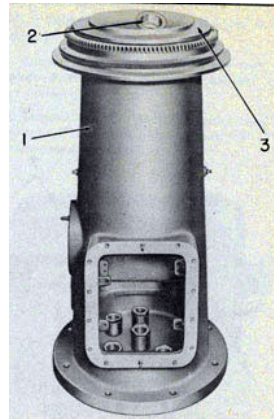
Assembly of Stand, Main Cable, Inner Bearing, and Training Stop Mechanism.
